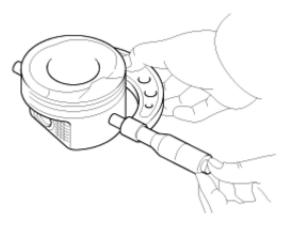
Measuring Piston Outside Diameter Courtesy of HYUNDAI MOTOR CO.
